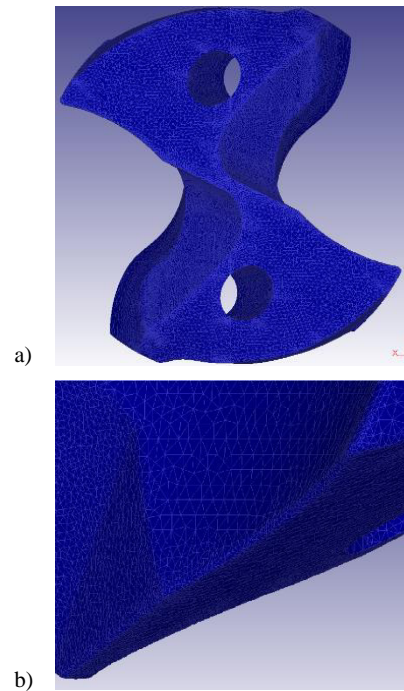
(a) Tool mesh from $-z$ view; (b) Detail on the cutting edge.
